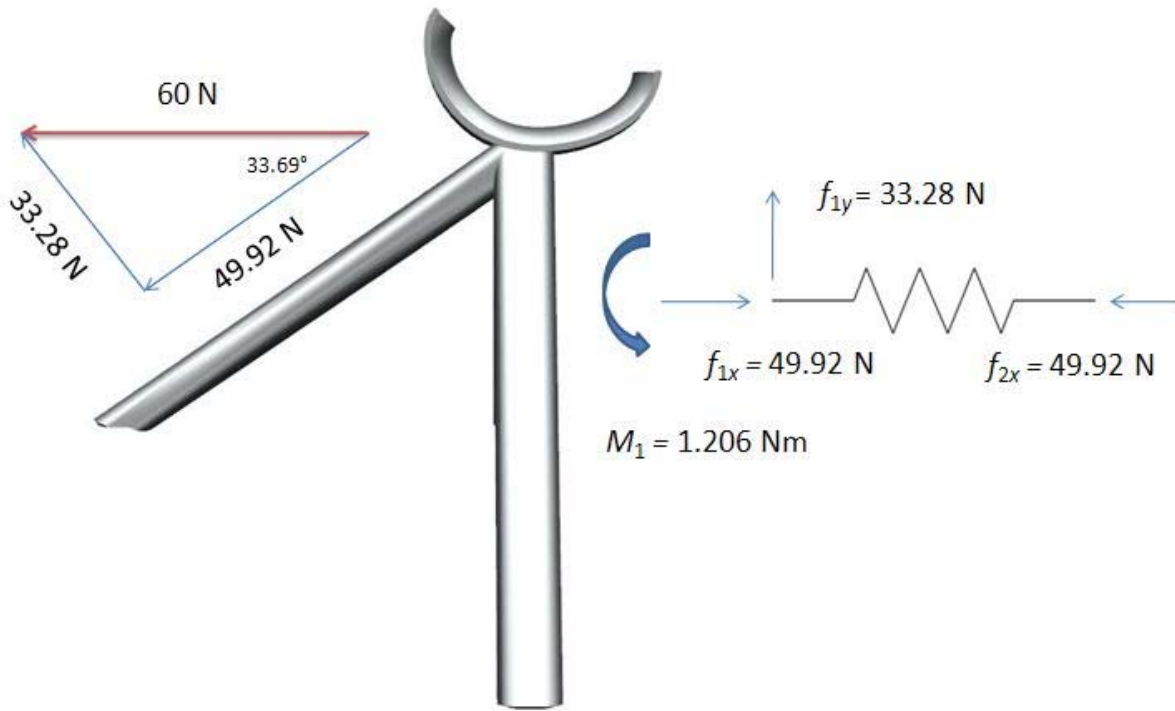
Spring and Beam Element Simplification for Thumb Rest Loading
